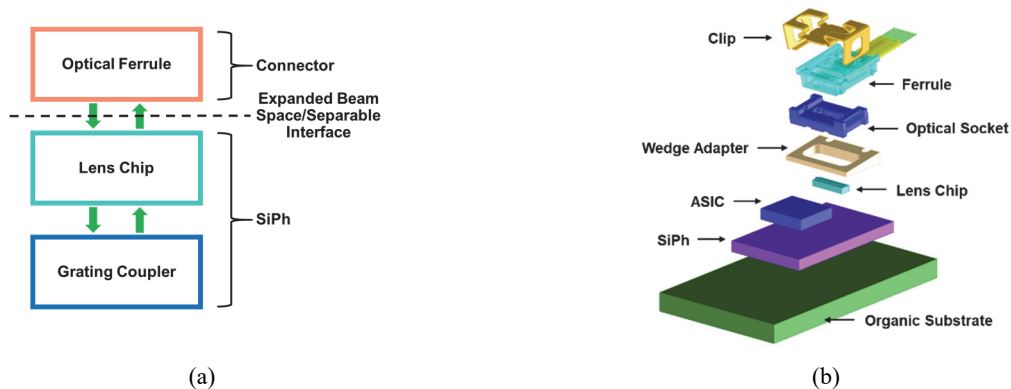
Detachable single mode optical interface (a) block diagram and (b) optomechanical assembly exploded view.
